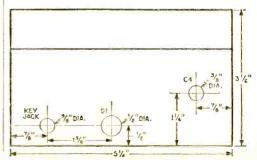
The coil form should be drilled as shown at left. Front view of the file card box below shows the cabinet holes.
